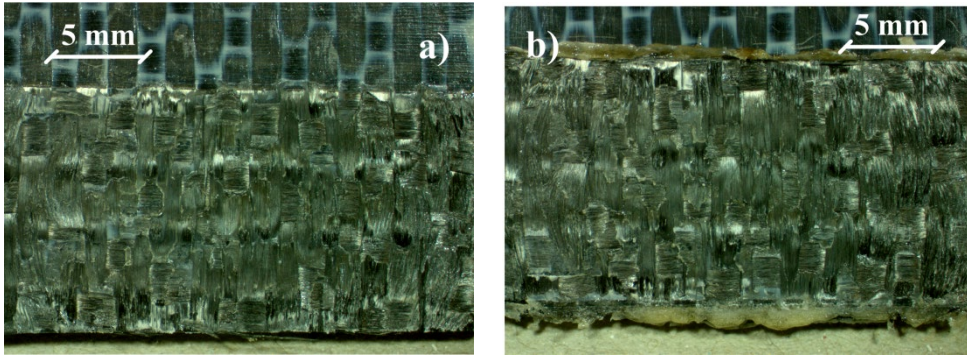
Fracture surfaces of the a) bottom and b) top adherends of specimen B02-02 (batch 2).
